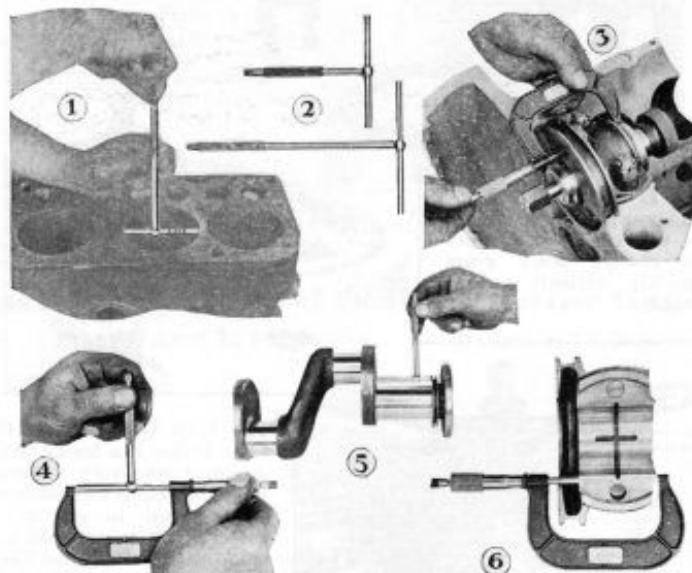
show No. 433 Special, 2 to 3 inch, "square frame" Micrometer required for checking the length of "V-8" rear main bearings and caps while being faced off. Ordinary micrometers will not clear the oil pan seal on this bearing cap. Fig. 1-2 show Telescope Gauge No. 426 used for checking cylinders and rear hub bores. The points are rounded to fit the contours of a circle. Fig. 2-4-5 shows No. 428 Telescope Gauge with "flat" points used for checking the space between flanges of the Crankshaft. Telescope Gauges have proven superior to Inside Mikes for the purposes we have recommended because no skill or experience is required to get accurate results,—just place the Gauge in the Cylinder bore, Hub bore or Crankshaft Main Bearing as indicated in Fig. 1-5, then tighten the lock nut on the end of the handle. Then, transfer these measurements to a regular Micrometer as shown in Fig. 4. They will help you sell Engine Exchanges by showing your customer the exact condition of his cylinders.
